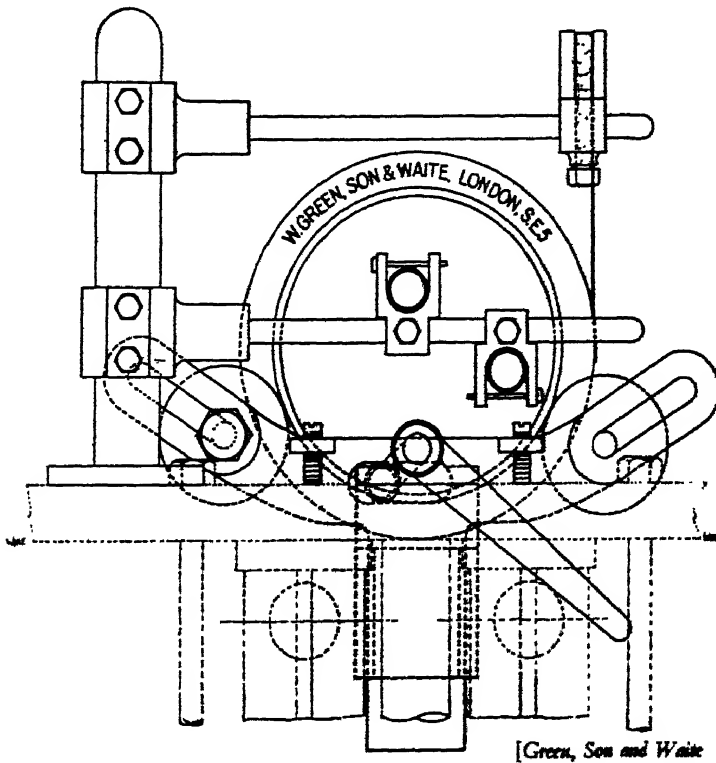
DANDY STAND, BEARINGS AND ADJUSTING MECHANISM FOR HOLLOW DANDIES
